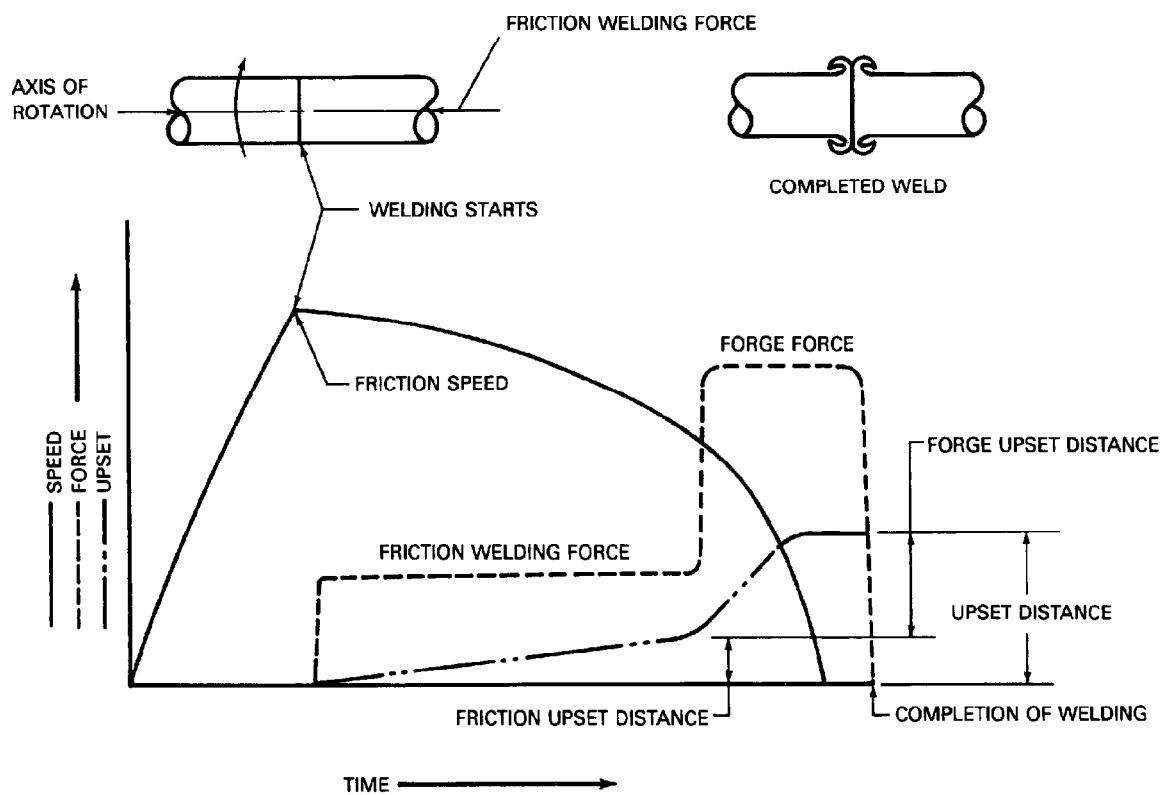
Generalized Diagram of Inertia Friction Welding
